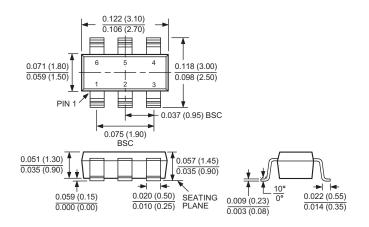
6-Lead SOT-23 Package (RJ-6)—Dimensions shown in millimeters
